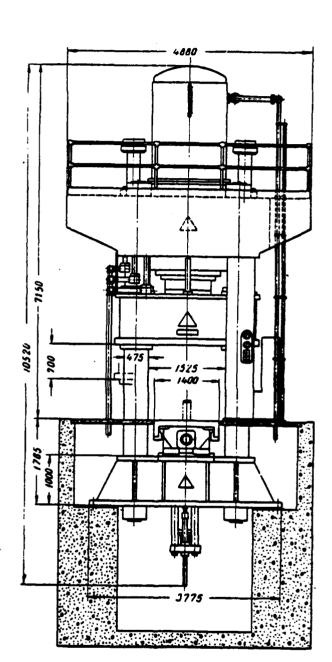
Single-cylinder hydraulic stamping machine by effort/force 2000 t (with the individual pumping drive).
